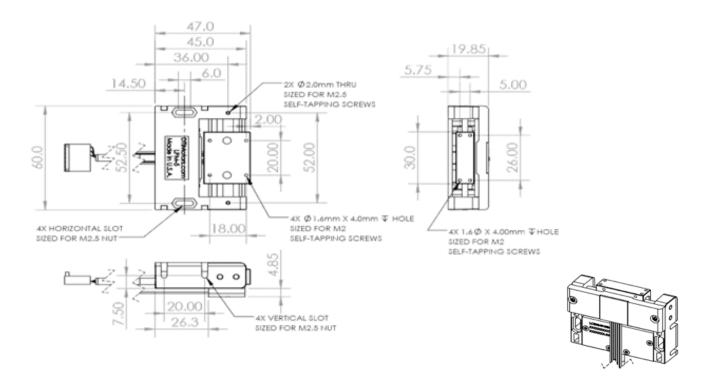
Mechanical drawing (mm) of LCS004-E linear motor with factory installed encoder
